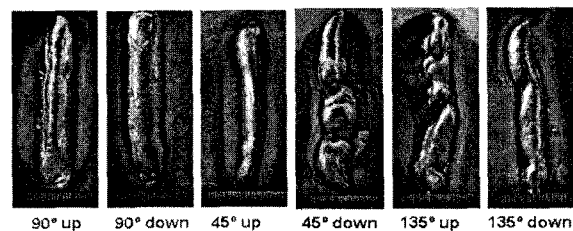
Bead shape of vertical welding positions, respectively
